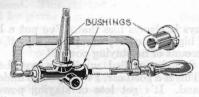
(above). Hack-saw through side wall of your spindle body bushings body bushings and they can be driven out easily
